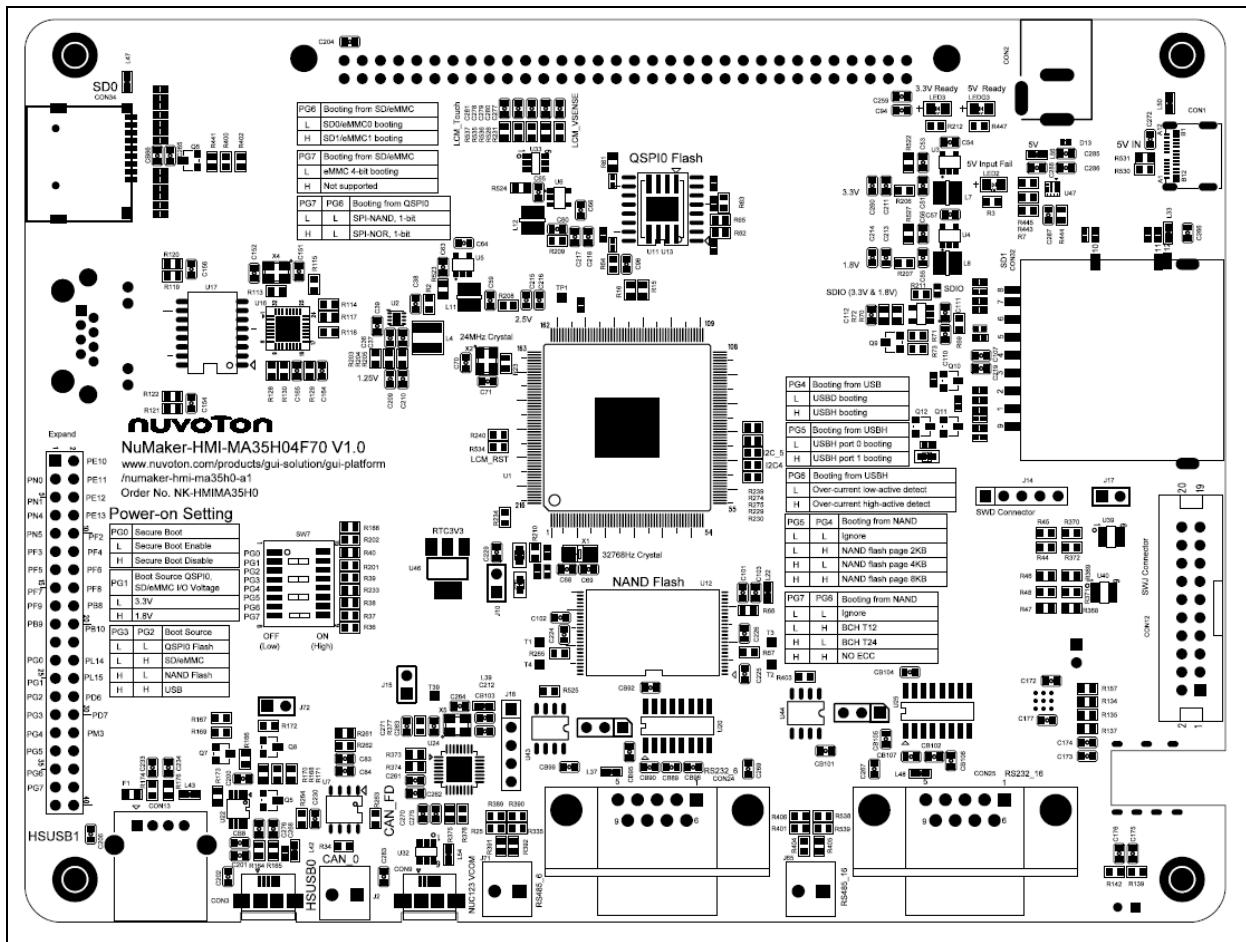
Front PCB Placement of NuMaker-HMI-MA35H070 Board
